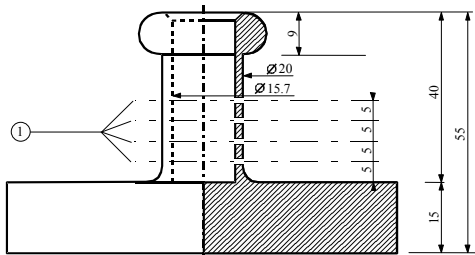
Hollow bronze cylinder, closed at one end; Plan and cut dimensions in mm
